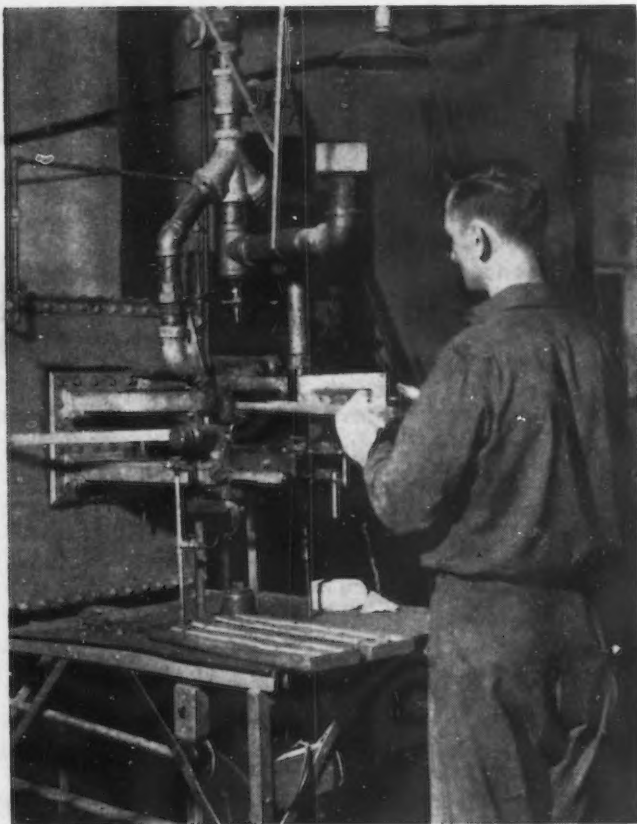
Flush filling a self-metering bushing die in a Bliss No. 21-B press with a scale, for occasional checking of weights at the left. Courtesy National Molded Products, Inc.
